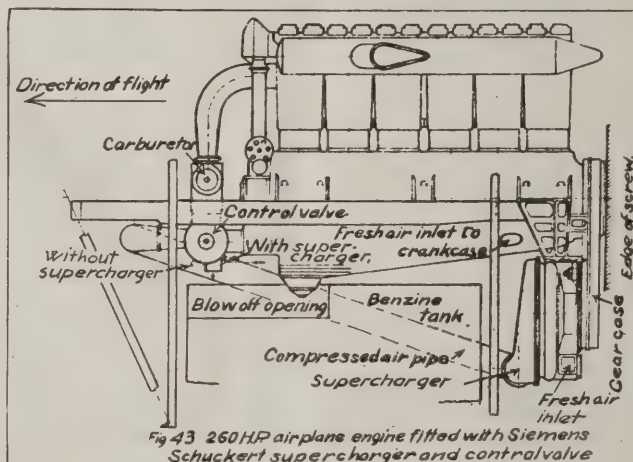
260 HP airplane engine fitted with Siemens Schuckert supercharger and control valve
